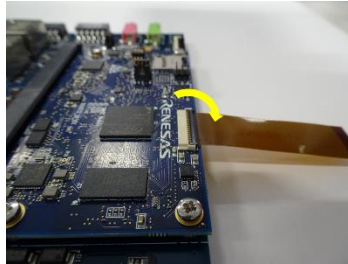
How to Install the 50-mm FPC Cable (3)
